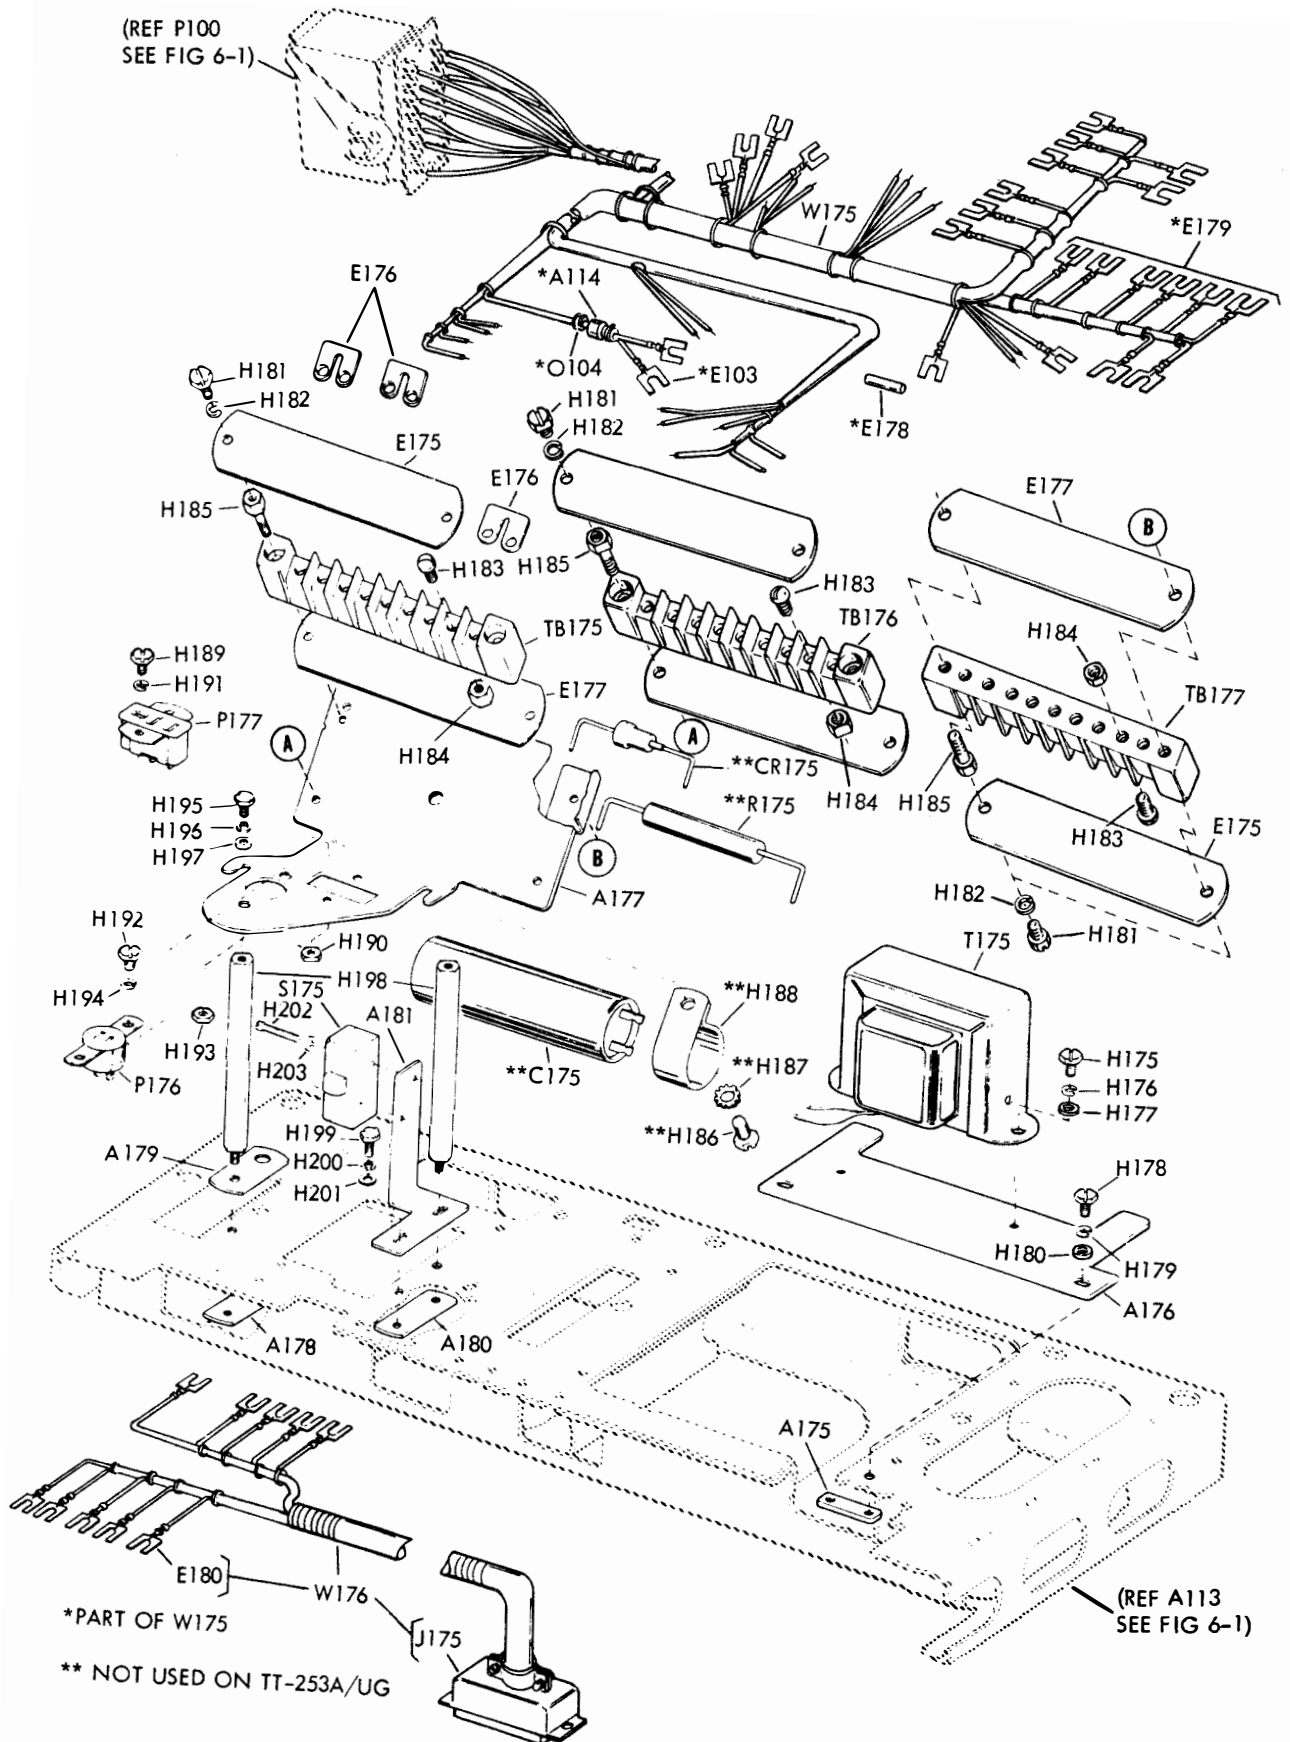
Keyboard - Base (TT-253/UG, TT-253A/UG and TT-292/UG)
